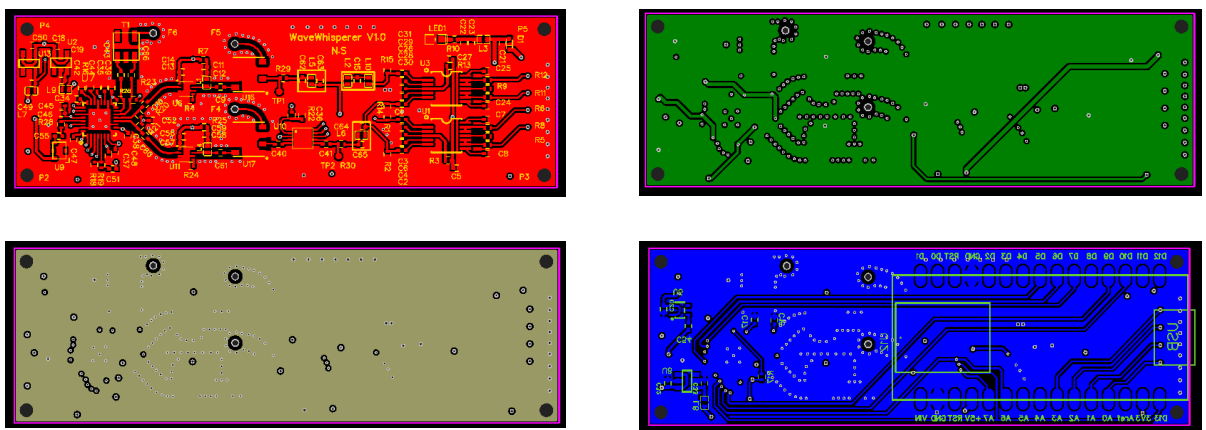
The different layers of the PCB. (a) Layer 1, (b) Layer 2, (c) Layer 3, and (d) Layer 4.
